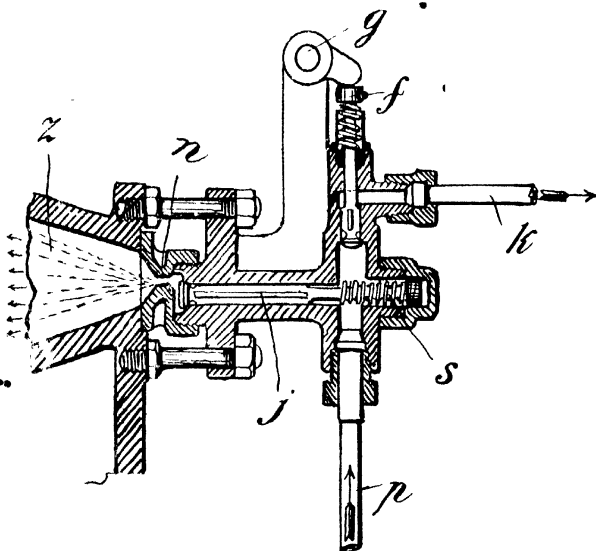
A. Spray-injection nozzle and governor-feed valve for Hornsby-Akroyd paraffin-oil engine.
